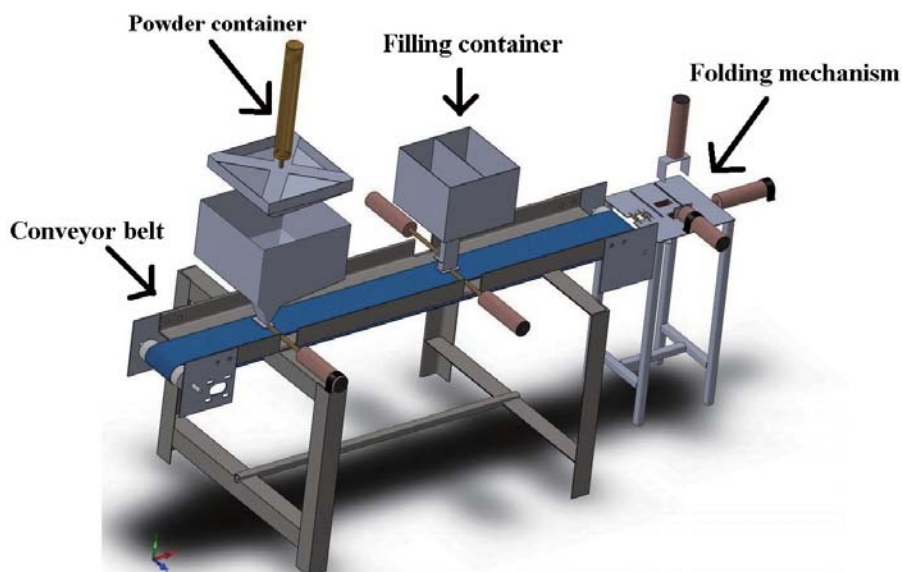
Design of the Vietnamese banana leaf cake maker machine
